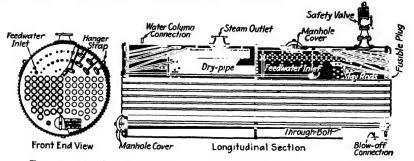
Showing shell construction of a horizontal-return tubular boiler.
